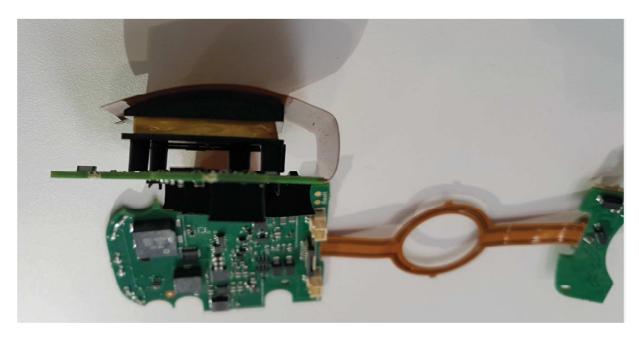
Side view of flexible PCB of Radio Module removed from main housing
